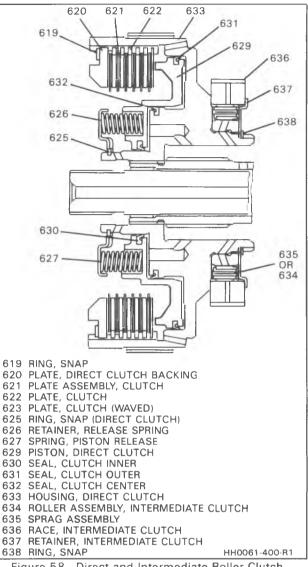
Direct and Intermediate Roller Clutch Assembly
